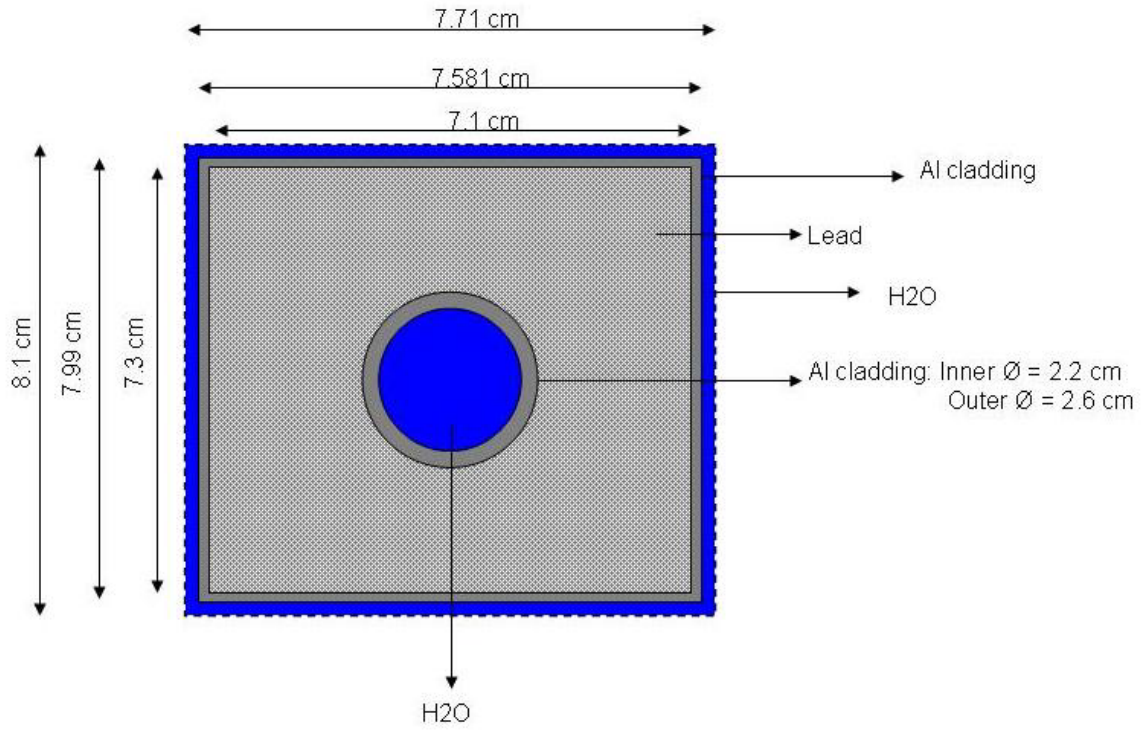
Radial View of the Solid Lead Type Reflector Assembly. [1]
